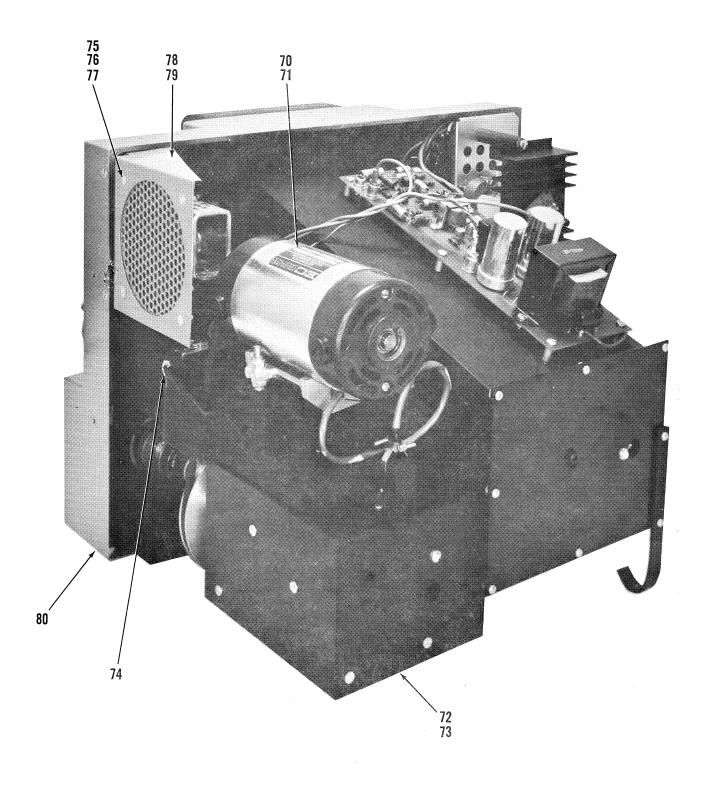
Library Reader Assembly (Sheet 3 of 3)
